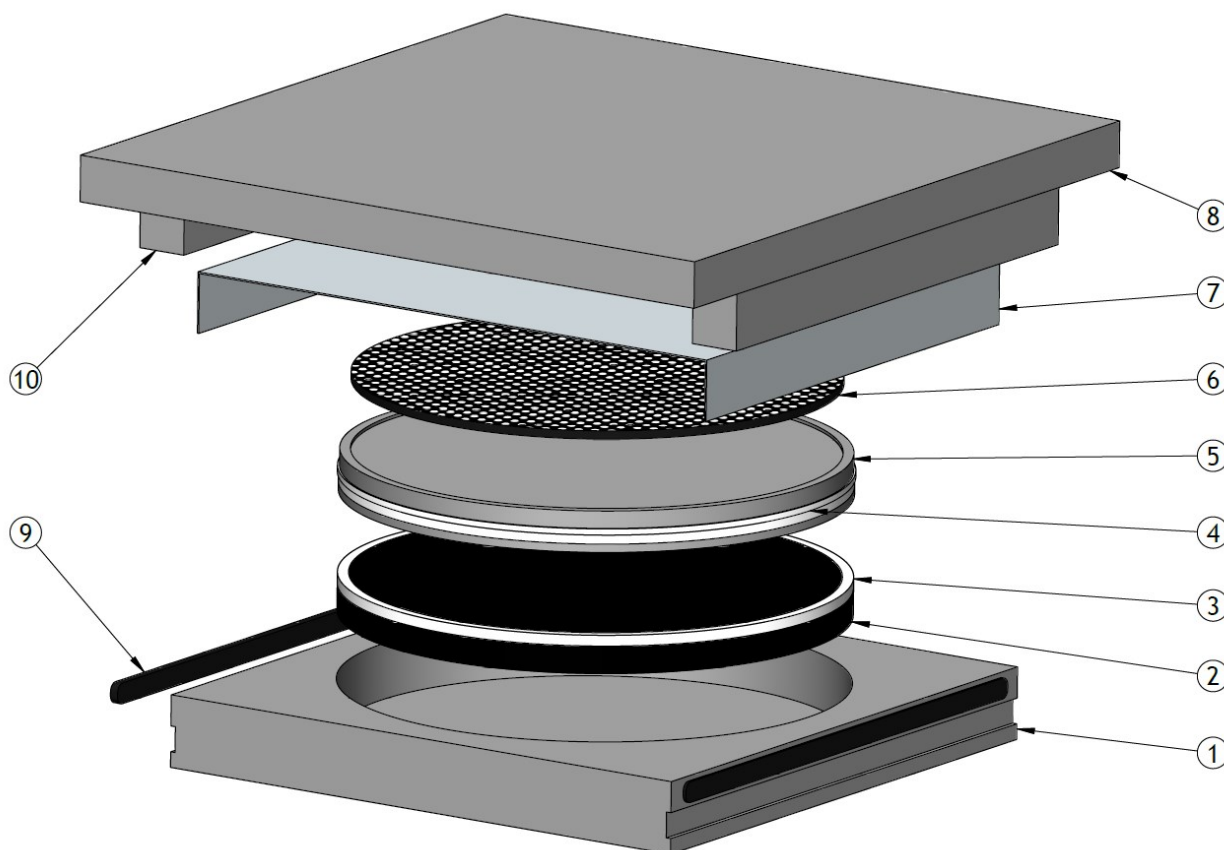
Exploded assembly, type PLe2; PTe2 (external guides)
